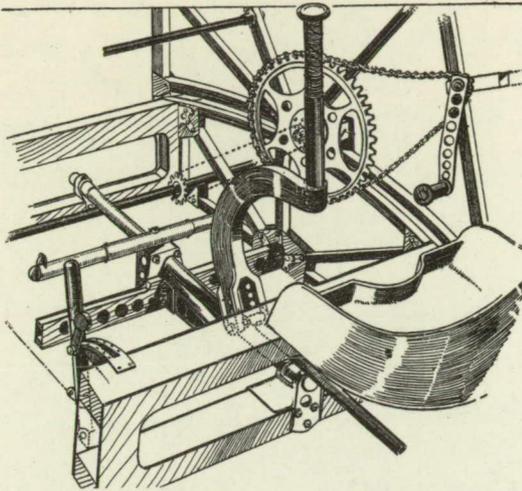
The lever which raises and lowers the landing gear. "Flight"
